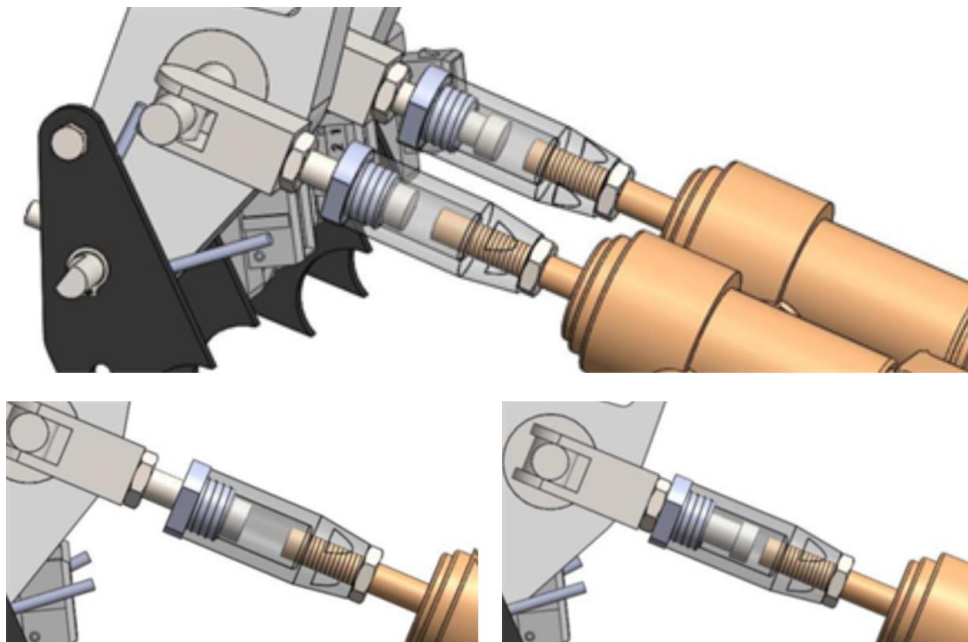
illustration of a regenerative braking regulator attached to the hydraulic brake piston [25]
